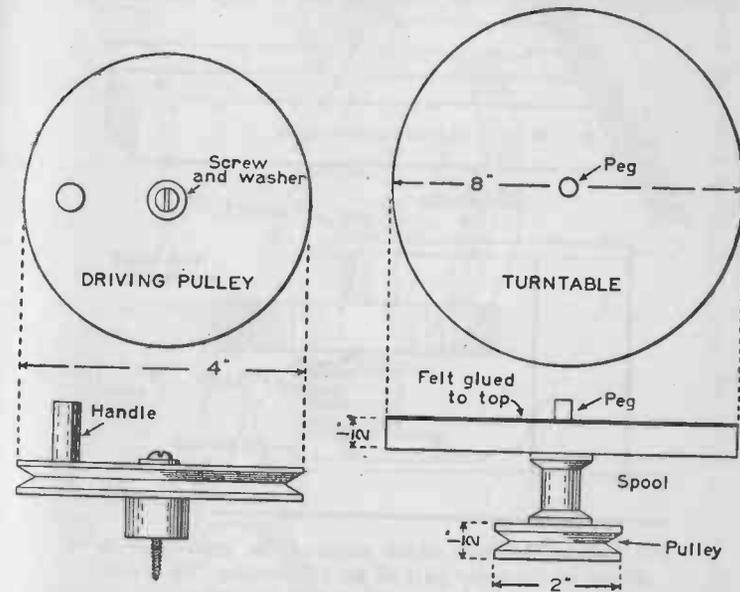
Details of the wooden turntable and driving wheel for the phonograph.
